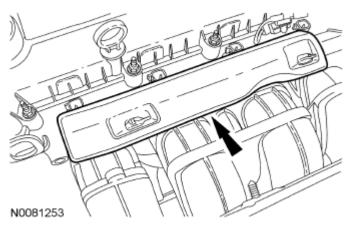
Locating Fuel Rail Insulator Courtesy of FORD MOTOR CO.
